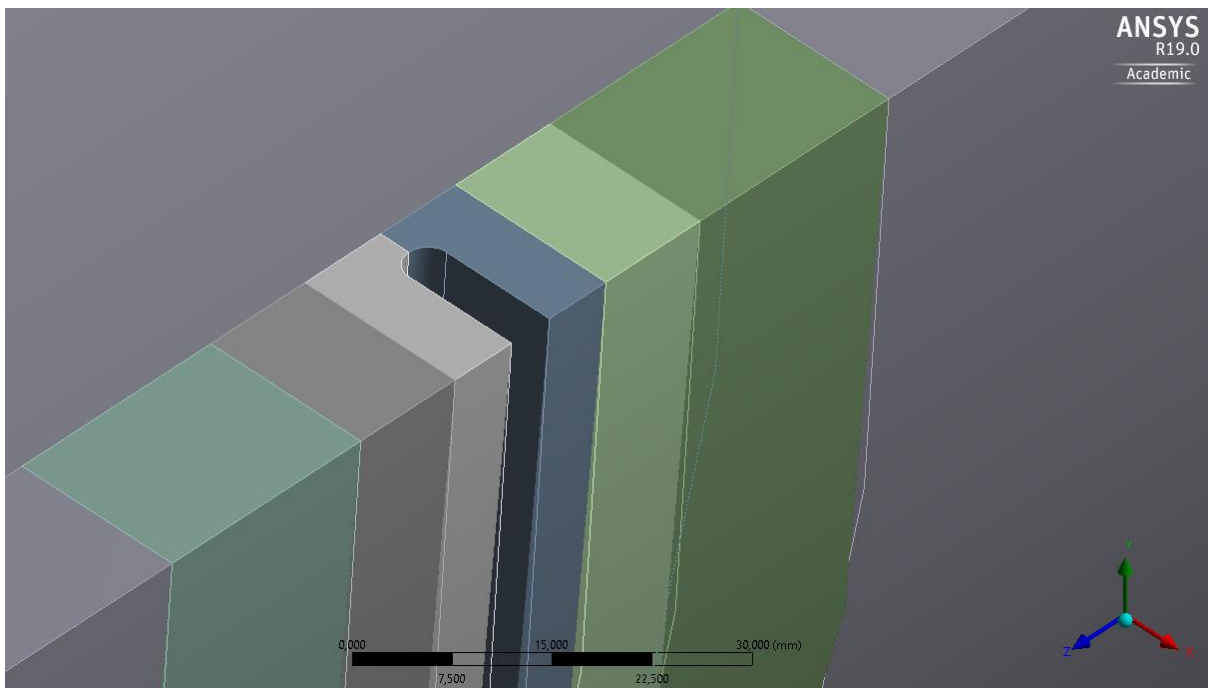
Cross-section view of pipe wall thickness including the 3 mm thick beadweld.
